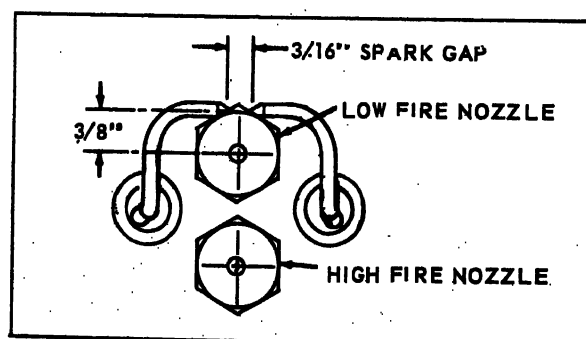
B. ELECTRODE ADJUSTMENT AND DETAIL ASSEMBLY
